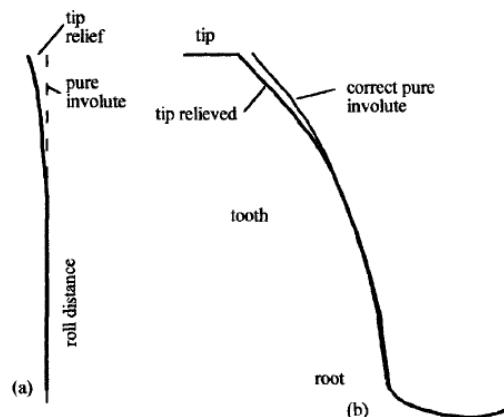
Picture of tip relief showing deviation from an involute in (a) and typical tooth shape (b).
